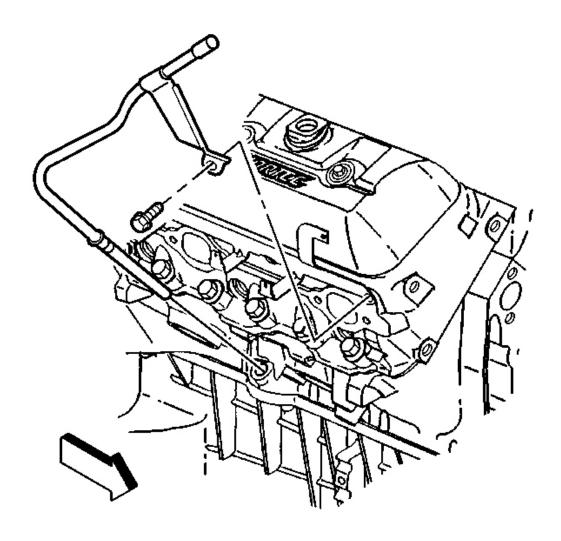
View Of Oil Level Indicator Tube Bolt Courtesy of GENERAL MOTORS CORP.
